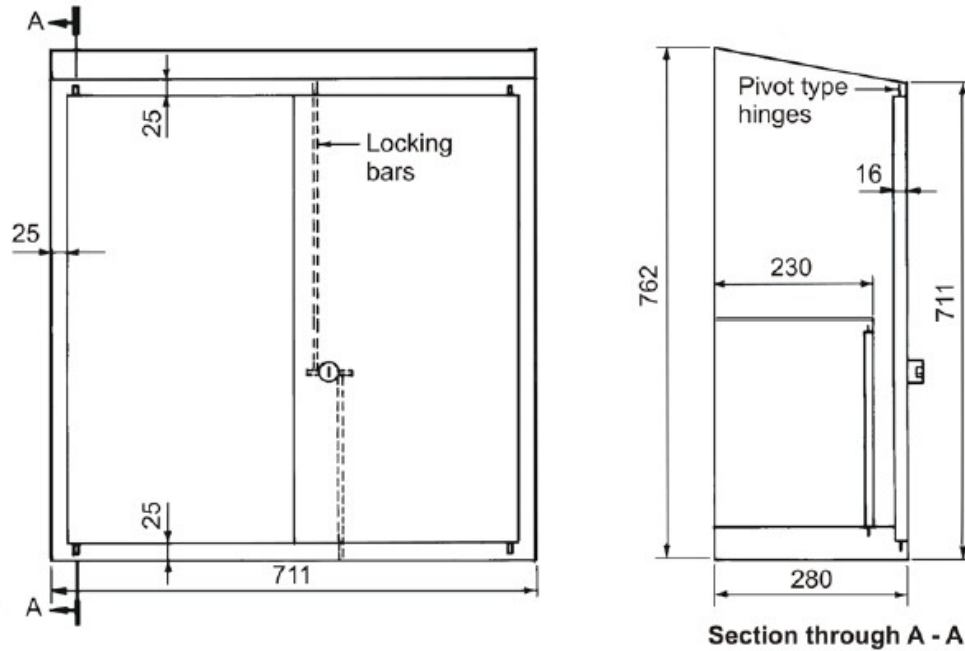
Type D drug/poison cabinet (Double door — Wall-mounted type) illustration
